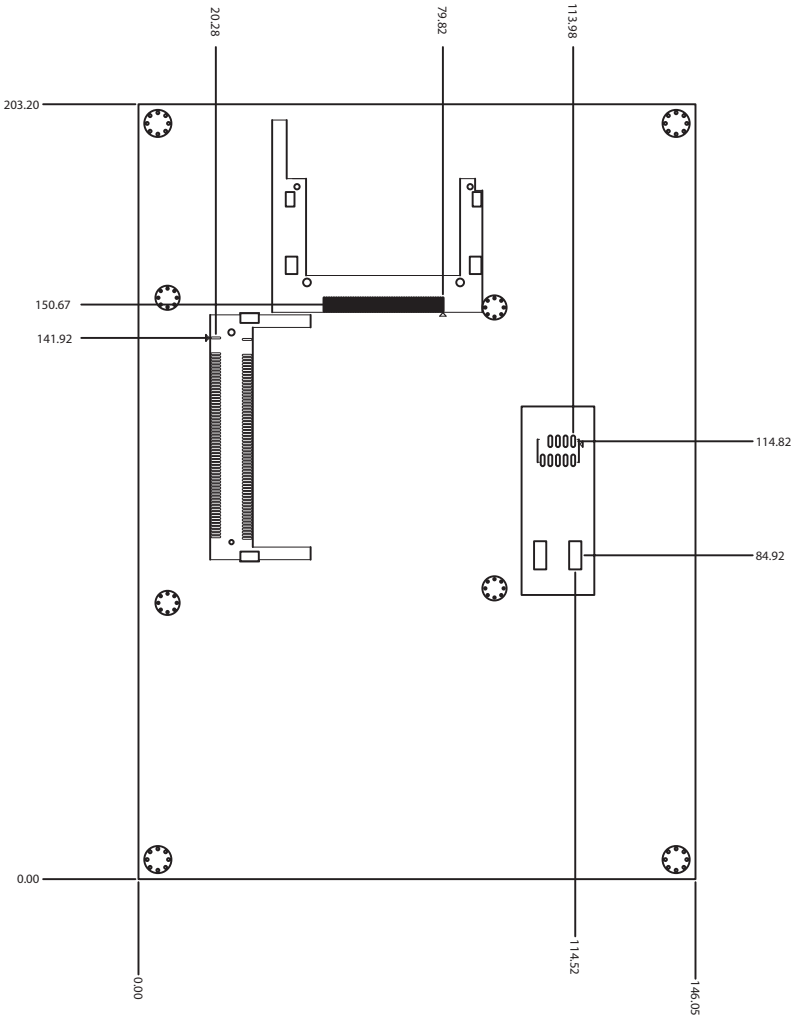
PCM-9584 Mechanical Drawing (solder side)
